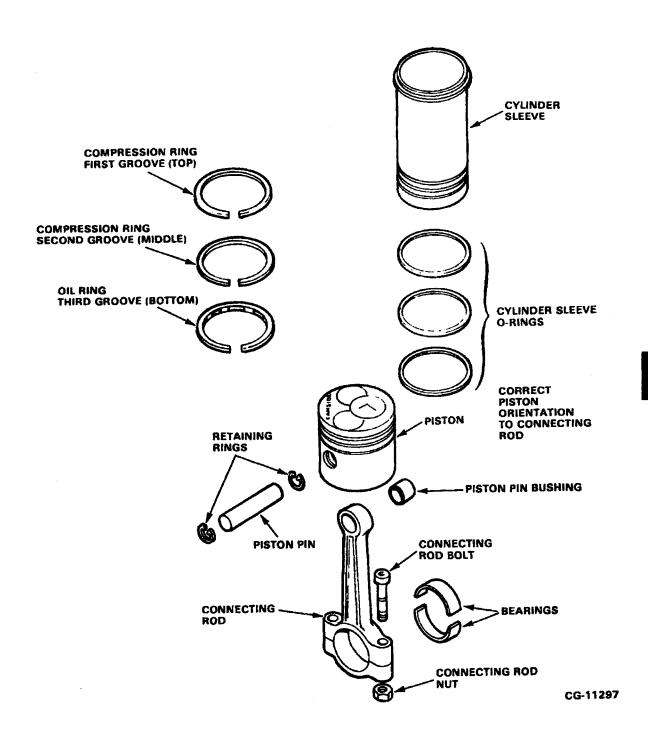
Connecting Rods, Pistons, Rings and Sleeves
